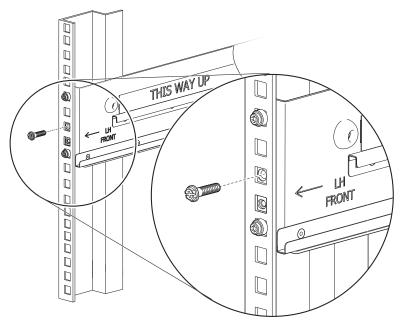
Attachment of front mount bracket to front rack cabinet posts
